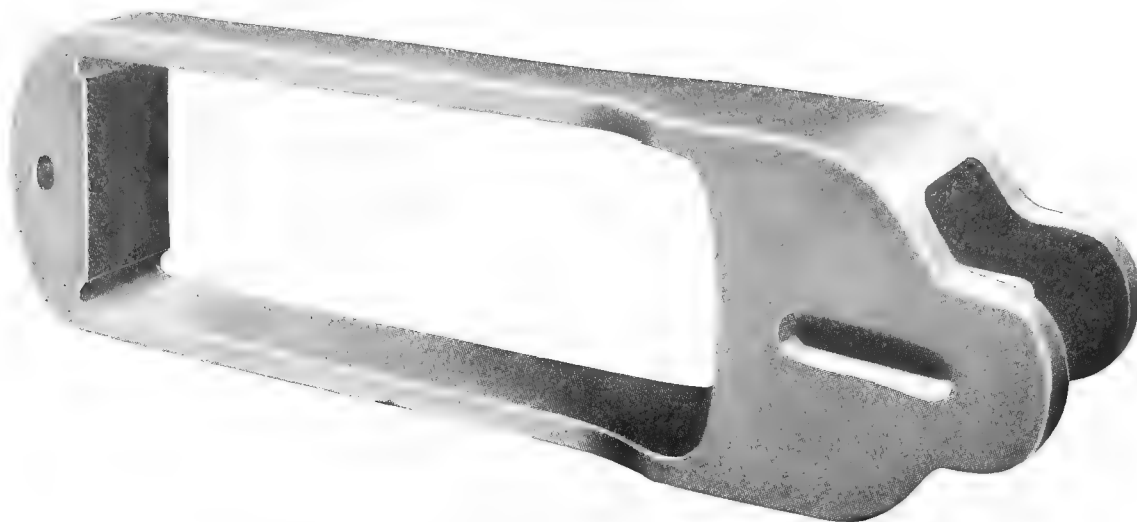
Buckeye Cast Steel Keyed Yoke for Friction Gears.
